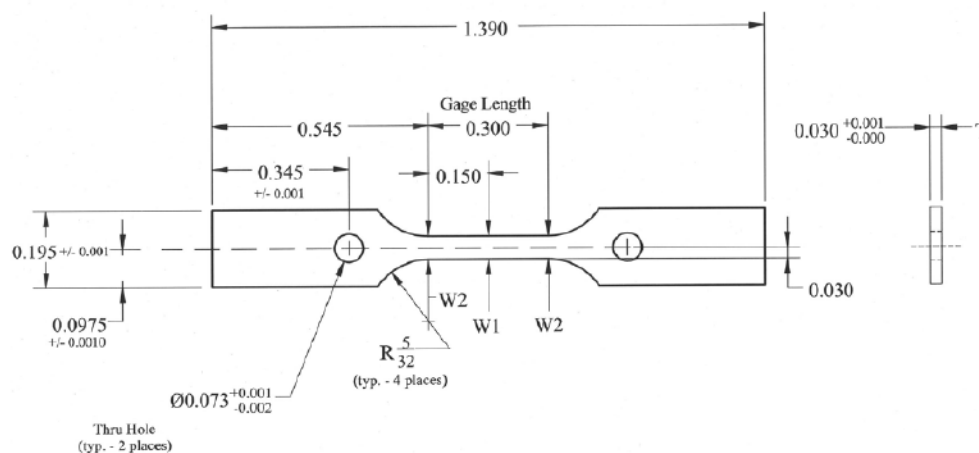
Schematic drawing of subsize sheet-type tensile specimens with extended grip sections for microstructural analysis.
